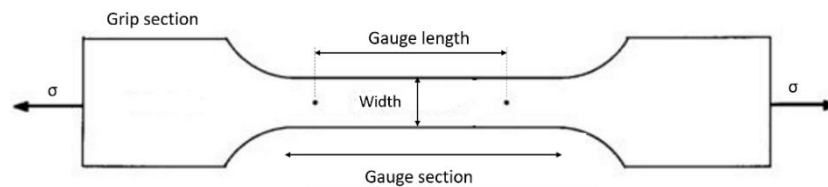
5 - Typical tensile specimen with an enlarged ends and reduced gage section. Adapted from ref. [53].
